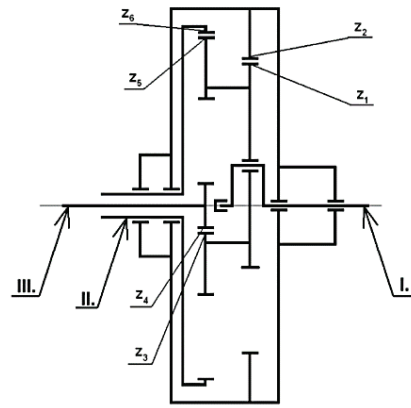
Planetary gear (I. – input shaft, II. and III. – output shafts, z_i – teeth number of individual gears: $z_1 = 90, z_2 = 99, z_3 = 81, z_4 = 72, z_5 = 101, z_6 = 110$)
